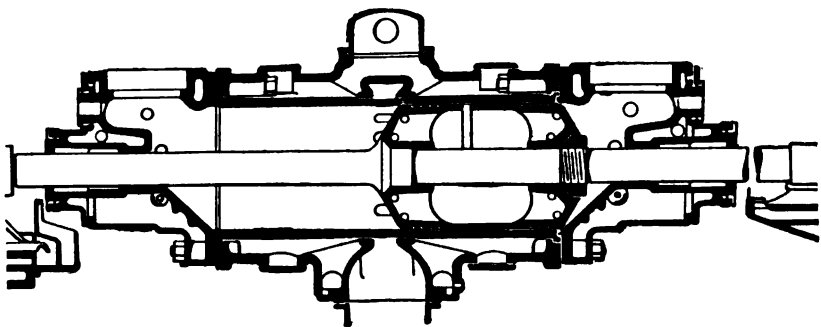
NEW CONSTRUCTION OF CYLINDER.
